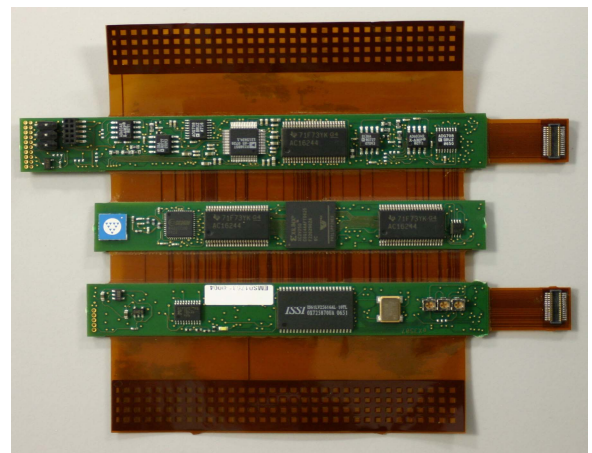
MOSAIC tile with electronics implemented on a flexi-rigid PCB to enable the electronics to fit within the 16mm x 16mm footprint.
